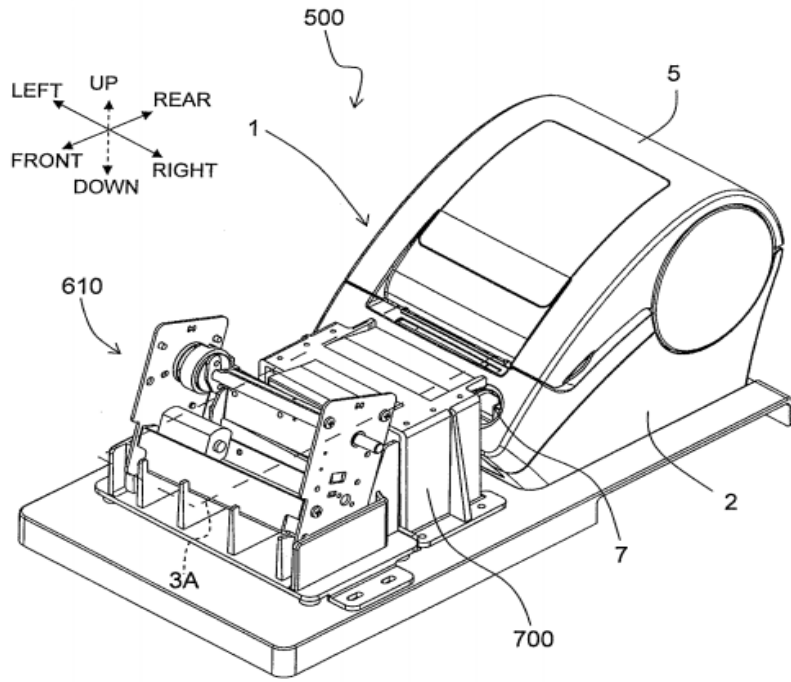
Patent No. 9,415,524 Full paper cutter assembly
